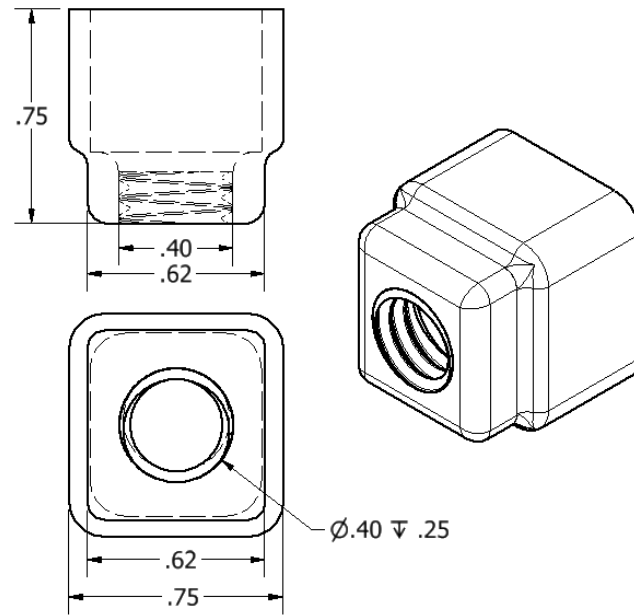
Connector for solenoid housing for Mark 1 grabber. Dimensions in inches.
